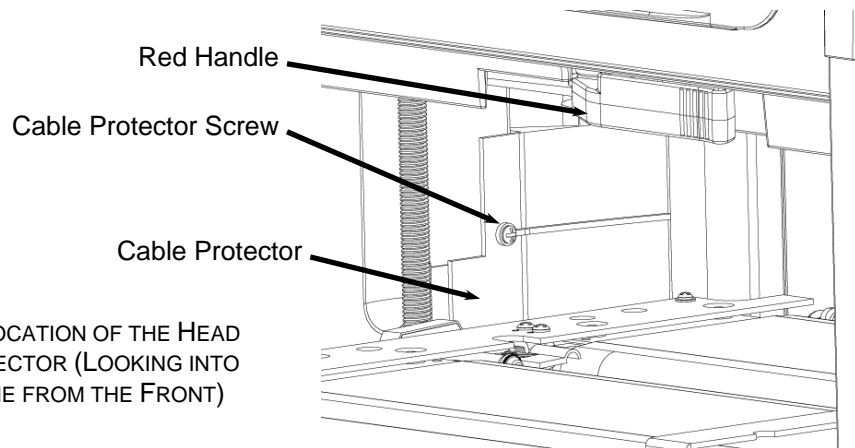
LOCATION OF THE HEAD CABLE PROTECTOR (LOOKING INTO THE MACHINE FROM THE FRONT)
